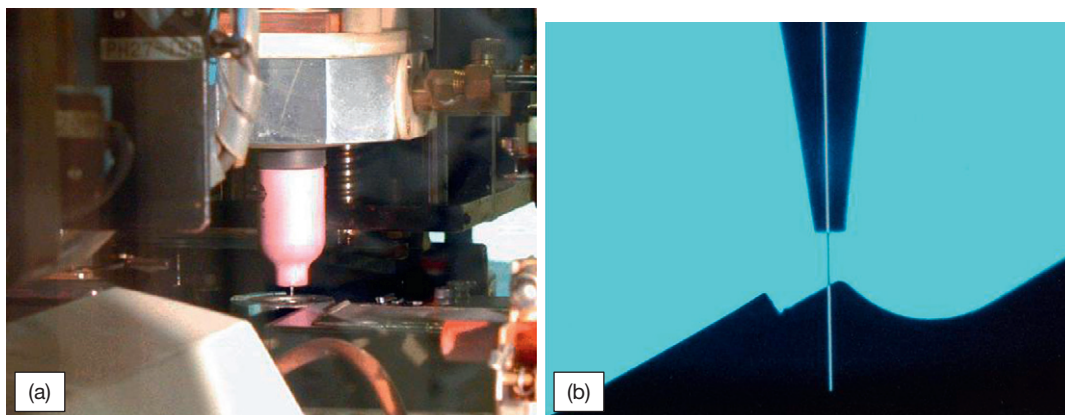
Photographs of (a) a welding torch and (b) an image display showing the position of the weld electrode.
